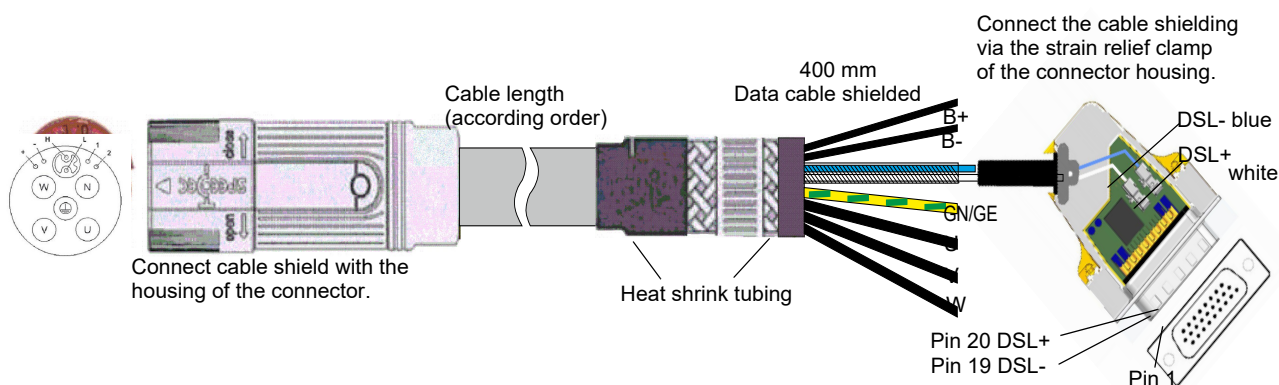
Motor cable with HIPERFACE DSL® 28 A
